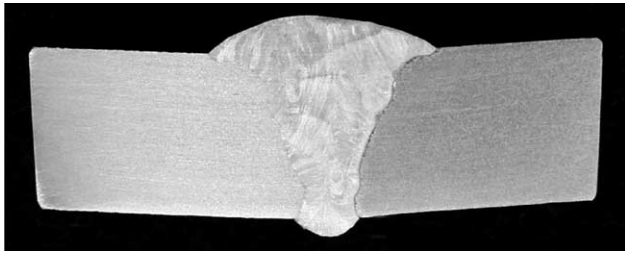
Macrostructure of the dissimilar steel welded joint (18G2A—right, 1H18N10T—left) after stress relieving by annealing at 850 °C. Adler etched, 2:1.
